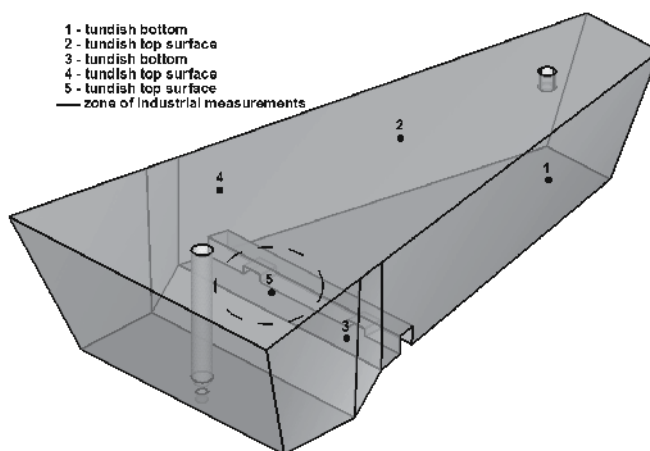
View of tundish with measurement points and zone of industrial measurements
